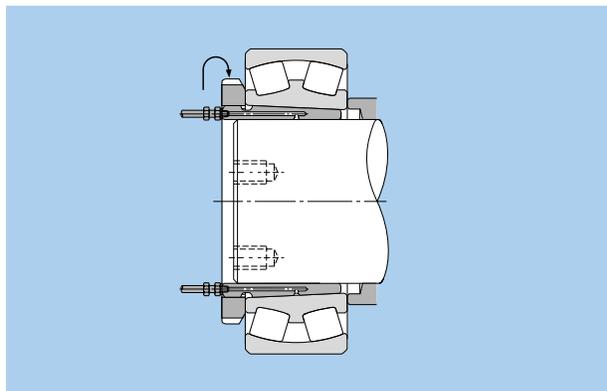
Disassembly using hydraulic withdrawal sleeve
